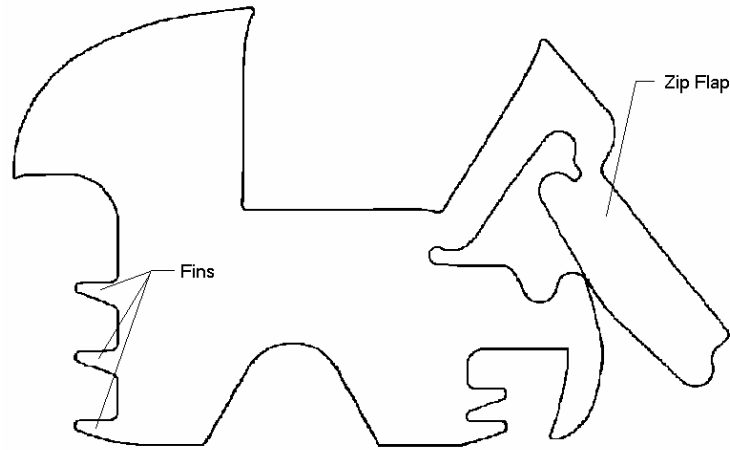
Sectional view of a gasket currently used in locomotive windshields
